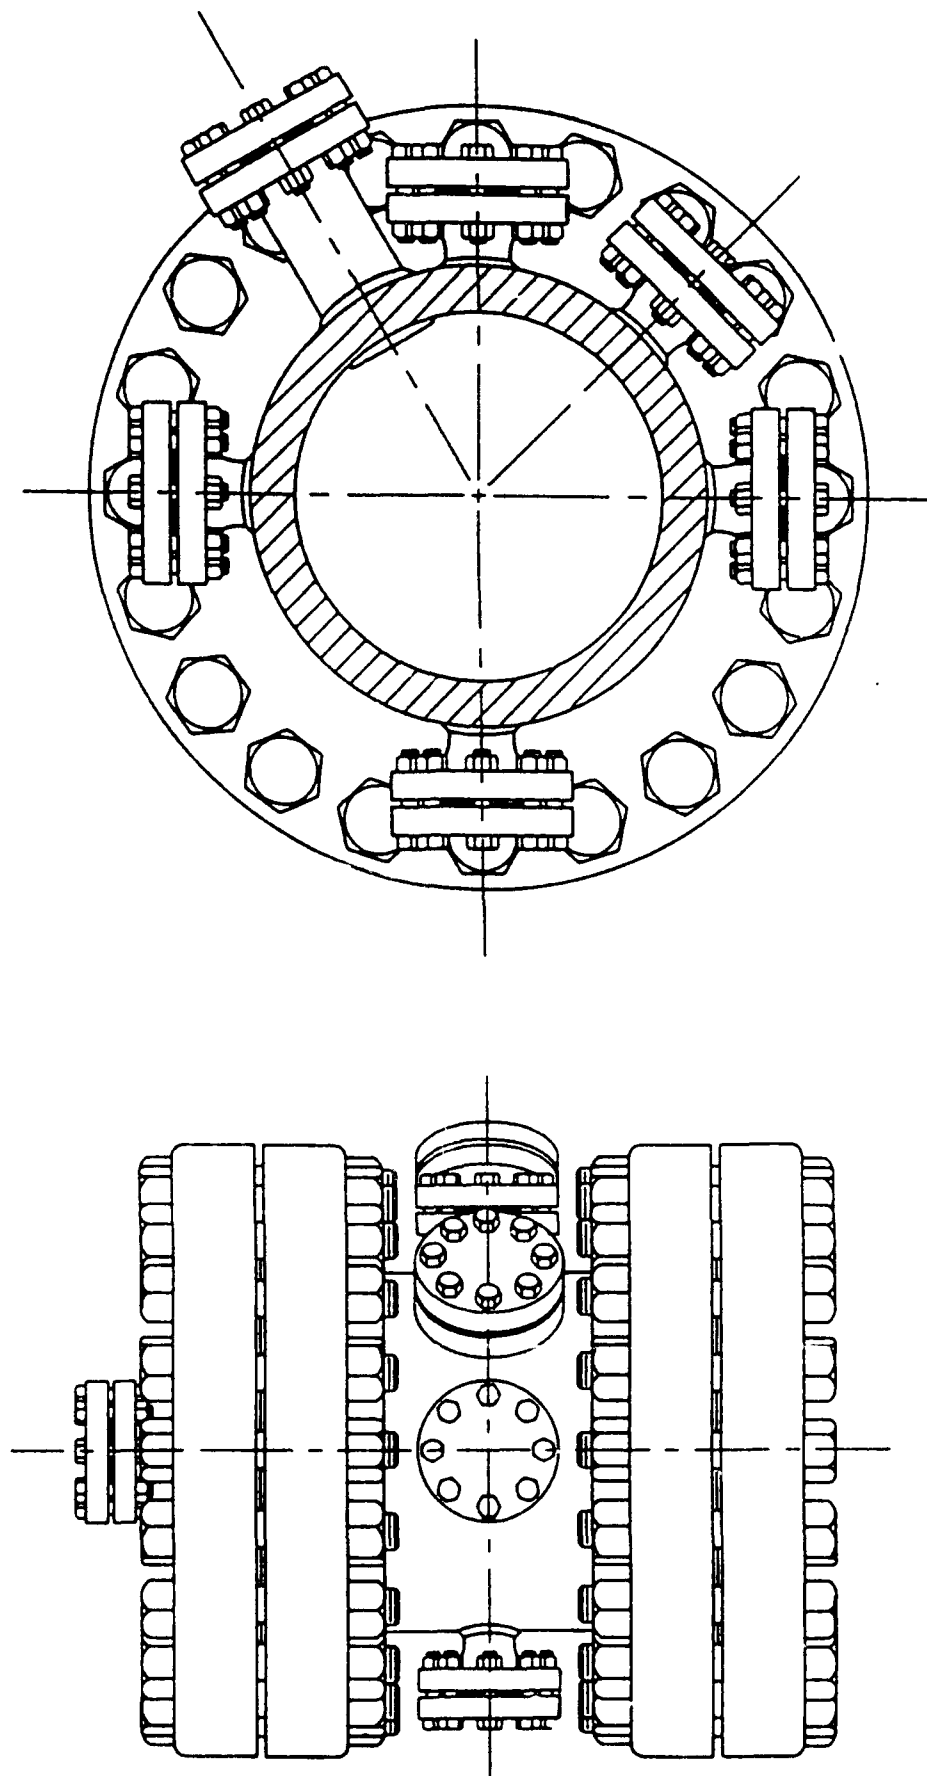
Design Drawing of Pressure Vessel - Top and Side Perspective.
